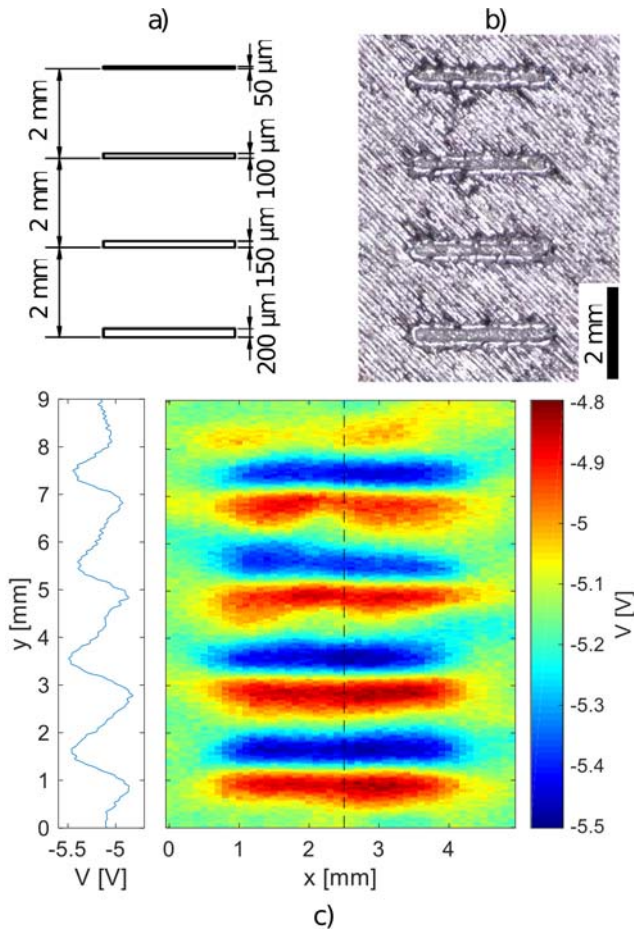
a) CAD drawing of desired defect geometry (depth $200 \mu\text{m}$). b) Microscopic picture of artificial surface defects in 316L-SLM-200 specimen. c) ET data of artificial surface defects in 316L-SLM-200 specimen.
